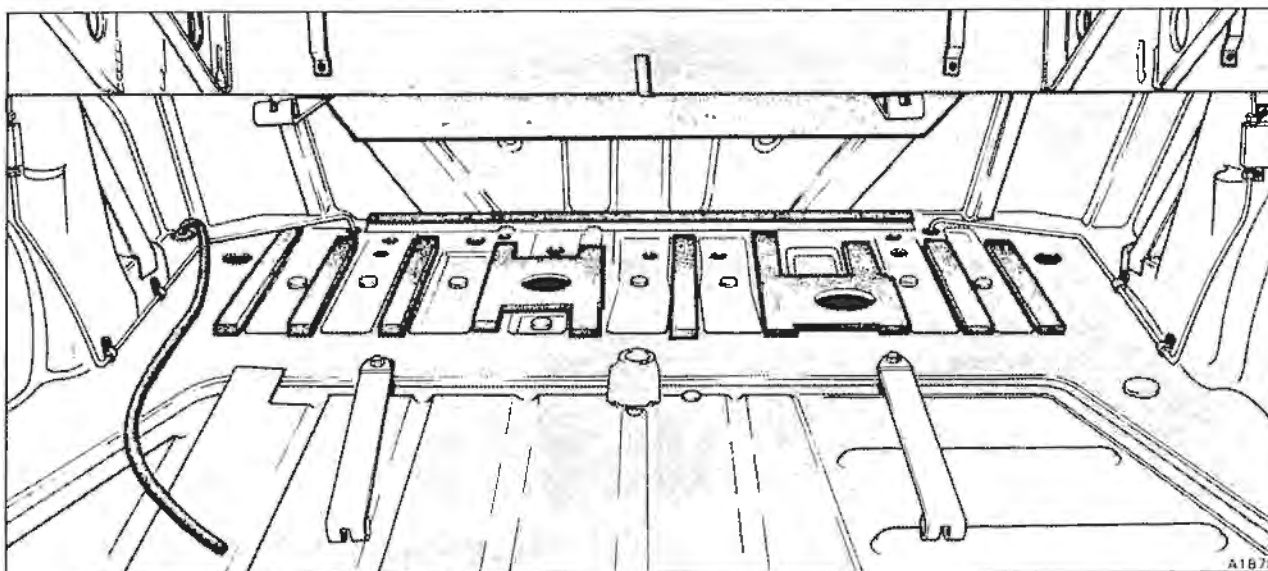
Fuel tank mounting pads and straps (2 door cars)
